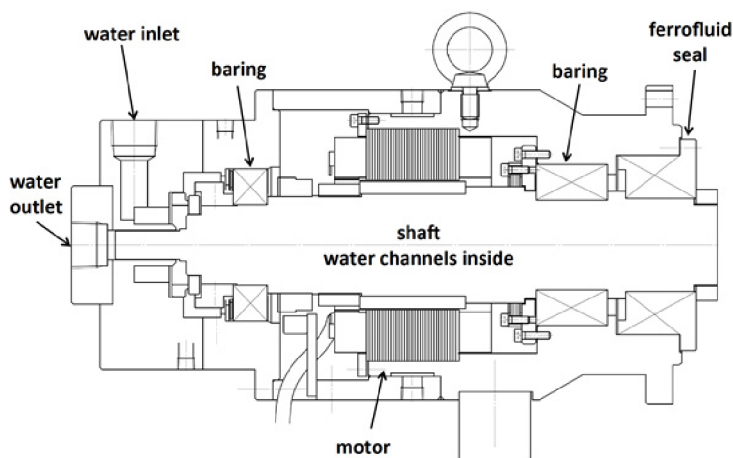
The design of the central part. The central part consists of a motor, two bearings, and the ferrofluid vacuum seal.
